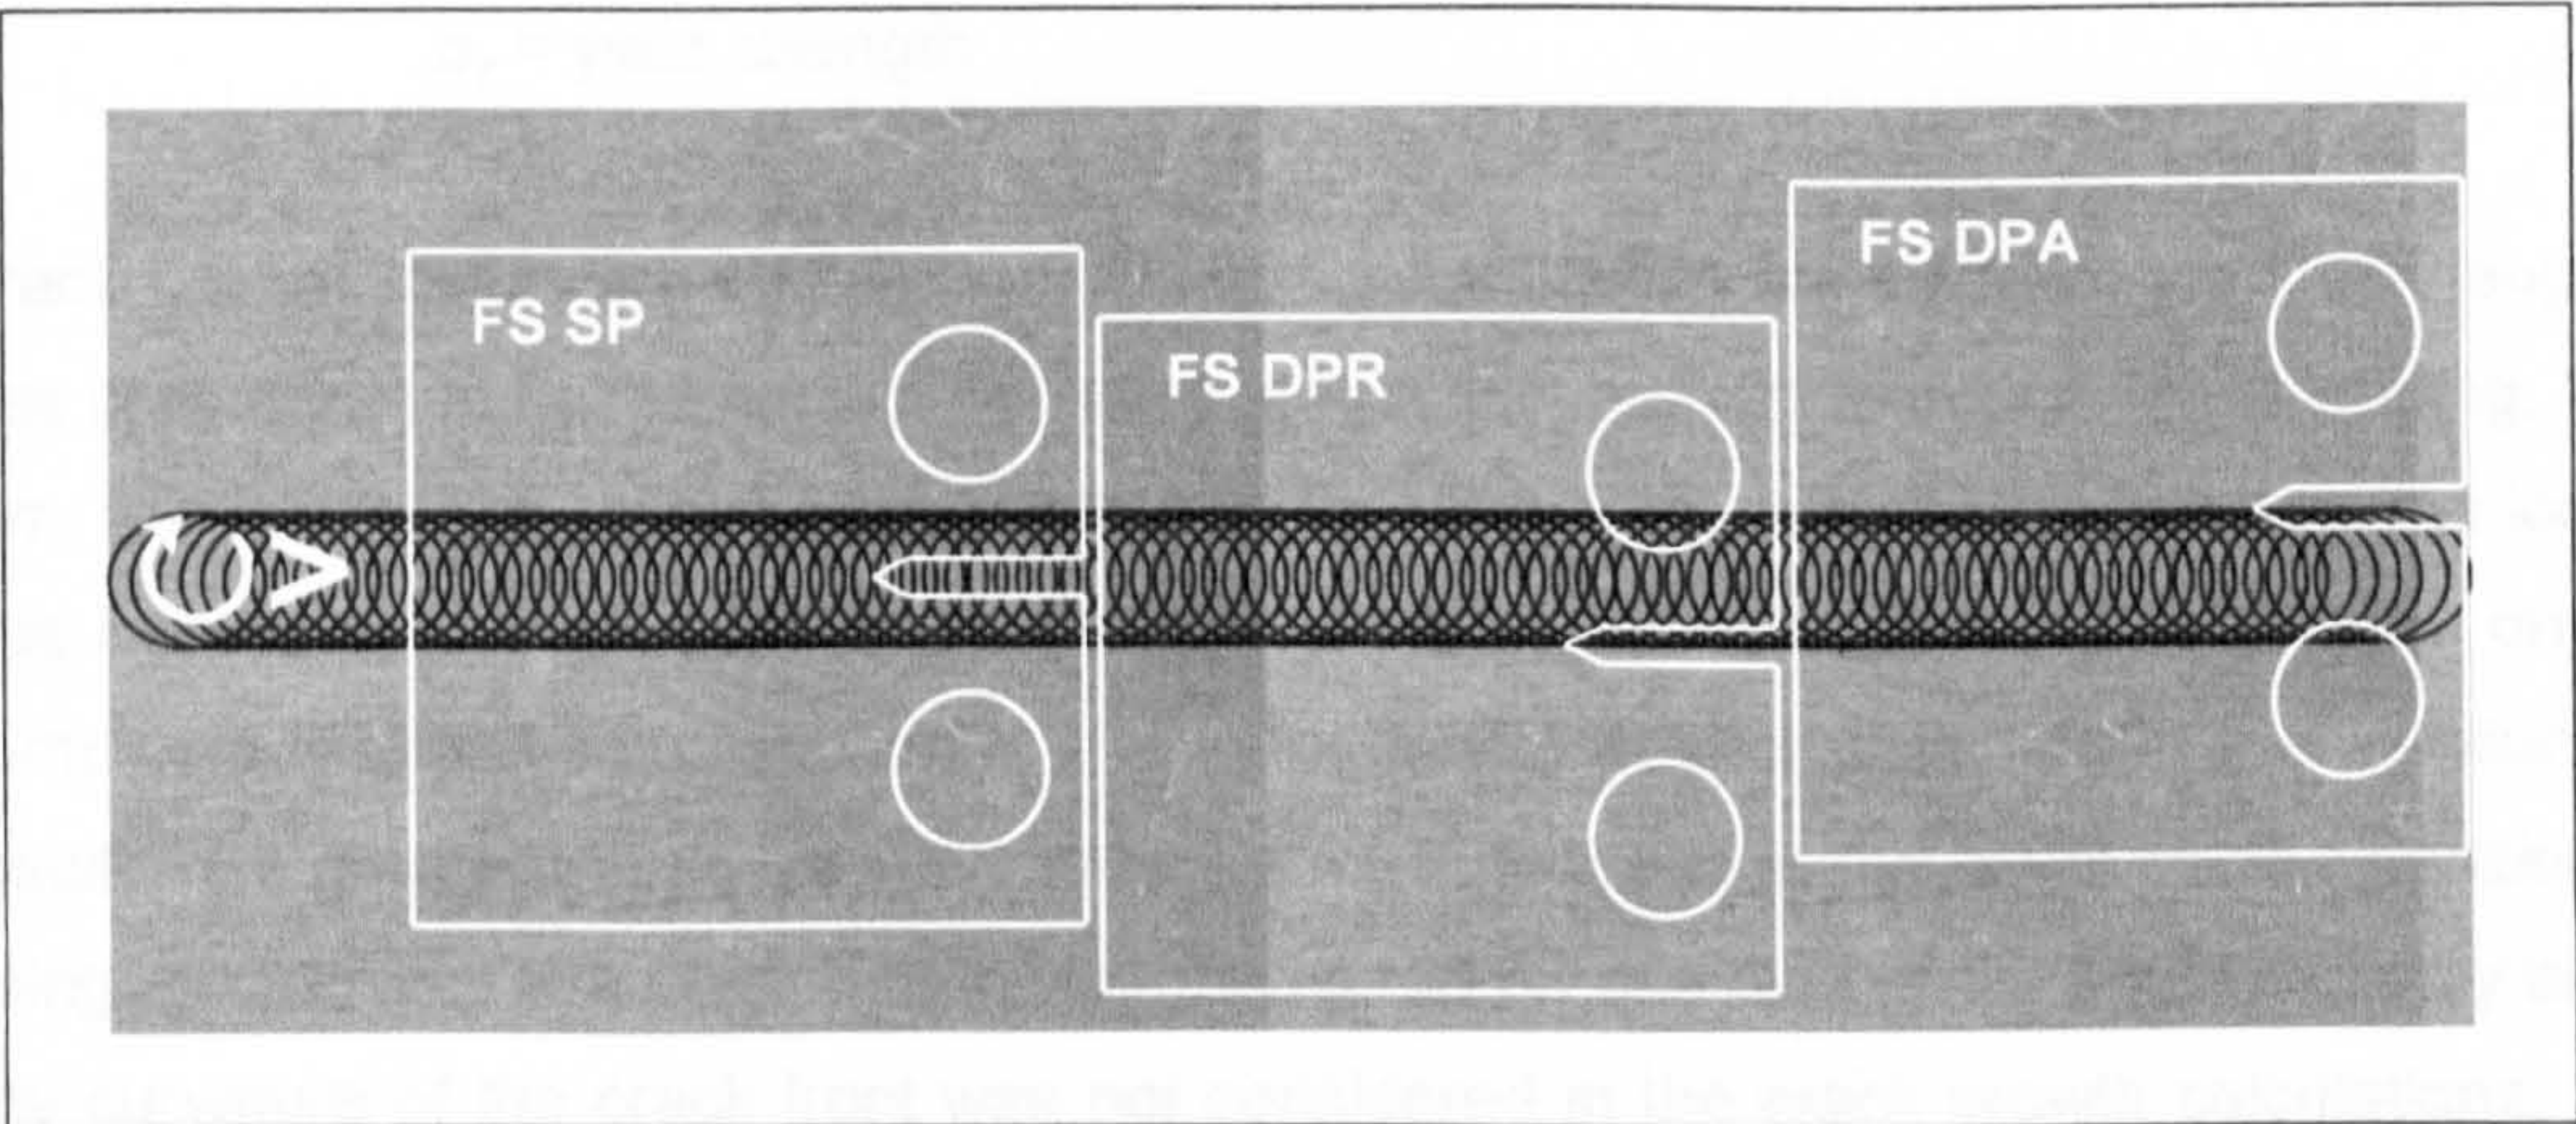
Position of CT specimens in relation to FS welds (friction band side for the single pass and second pass side for the double pass weld uppermost).
